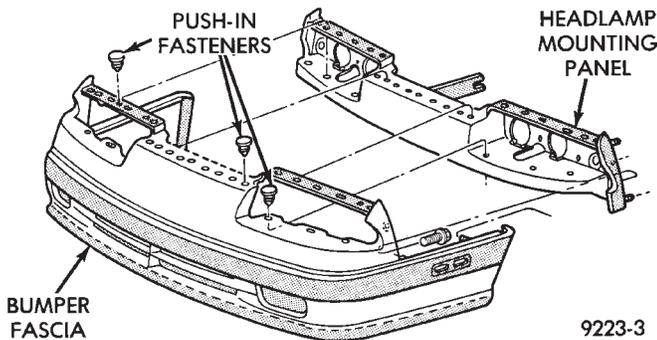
Headlamp Mounting Panel—AG-Vehicle
